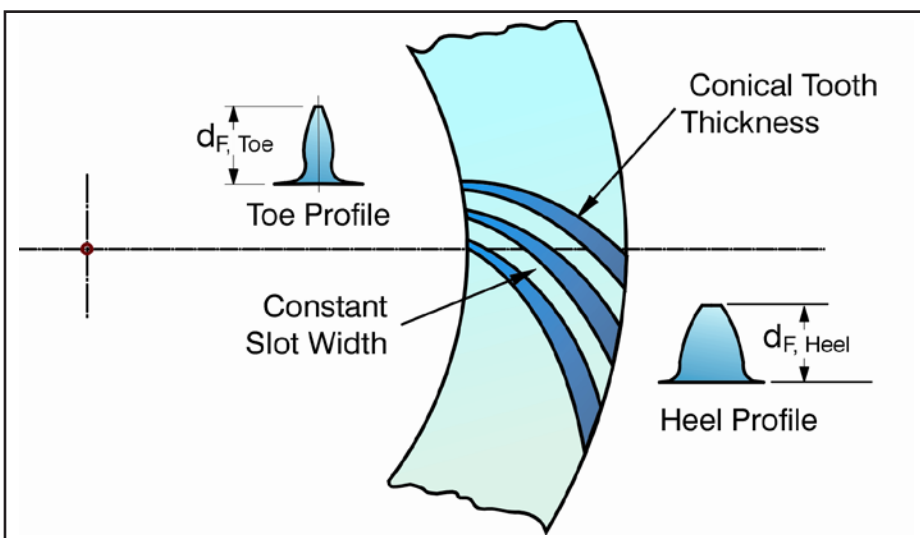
Flank lines in generating gear plane of parallel depth face milling; profiles of resulting pinion tooth.
